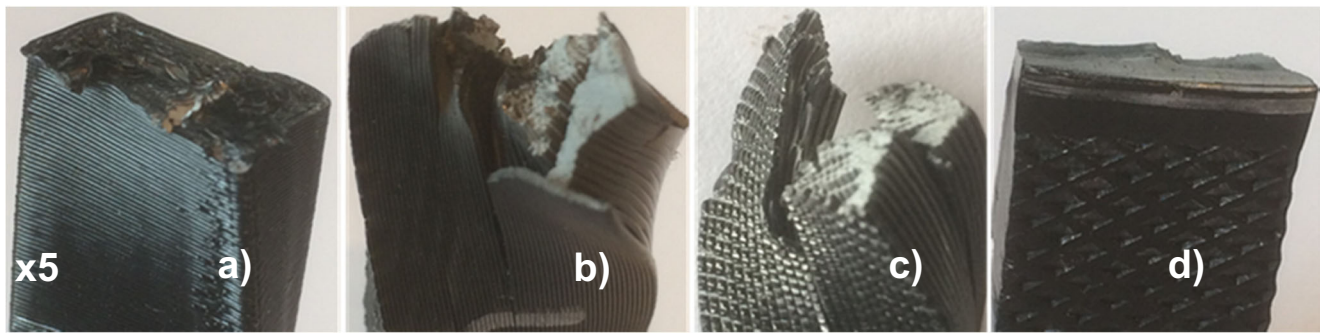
Images of the physical fracture on different specimens. (a) XZY-0° combination specimen, (b) XZY-0° combination specimen, (c) YXZ-90° combination specimen, and (d) Injection Molding Specimen
